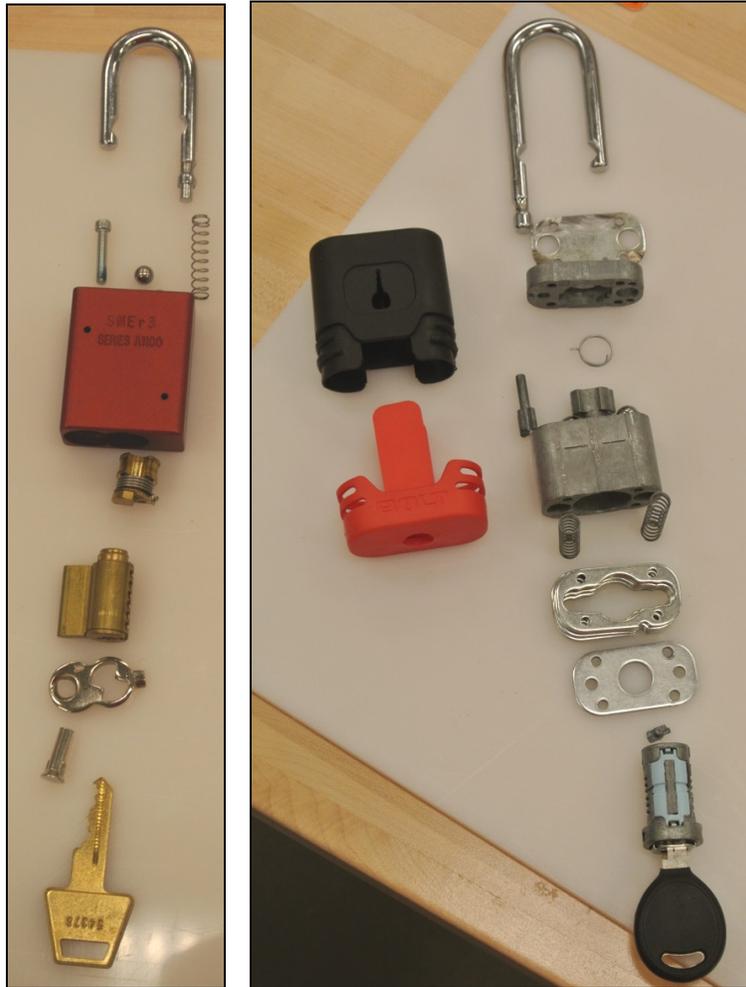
American Lock (left) and STRATTEC (right) padlocks disassembled.
